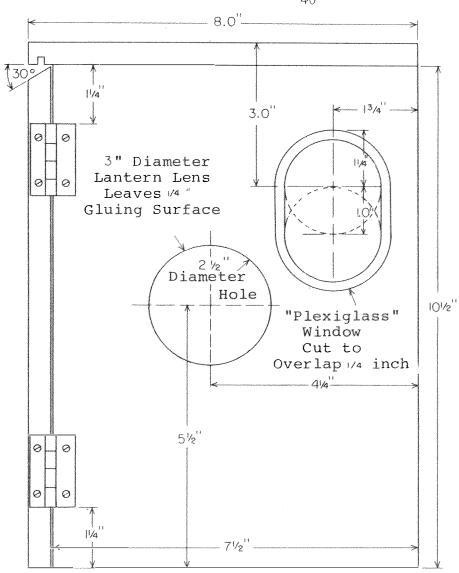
DIMENSIONS OF CAMERA CASE. (FRONT VIEW)
